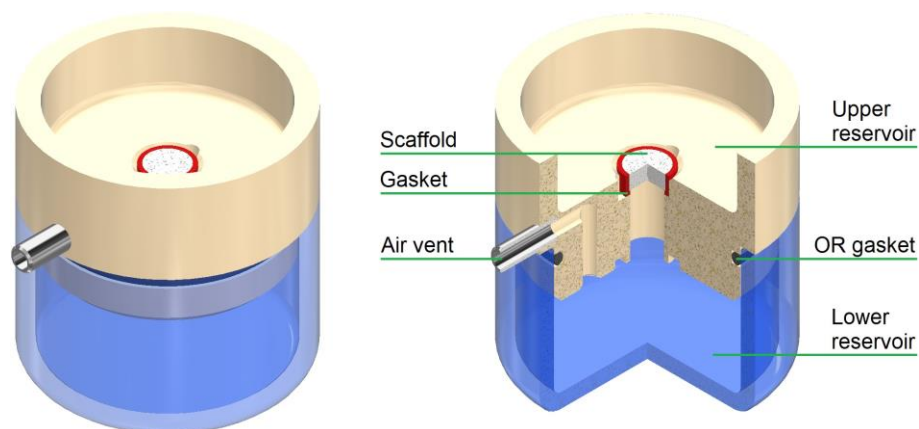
3D CAD drawing of the device for experimental characterization tests.
